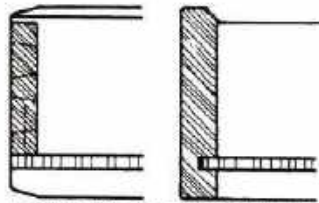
SECTION OF A DRAWER BACK AND SIDE
